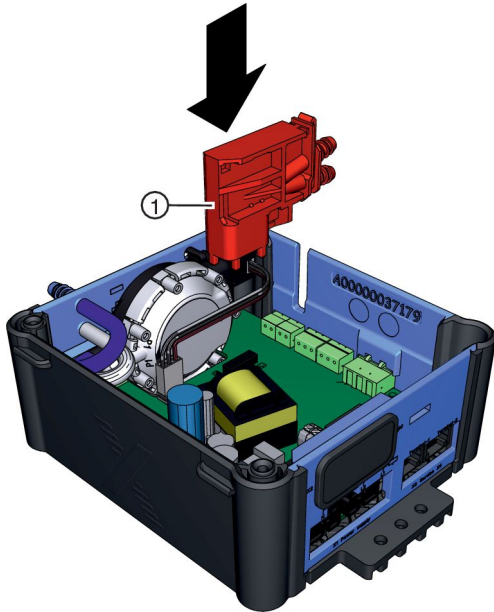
Plugging expansion module EM-DDT into the PCB.
